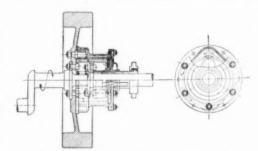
IMPROVED CO!L CLUTCH, FOR MOTOR CARS.
